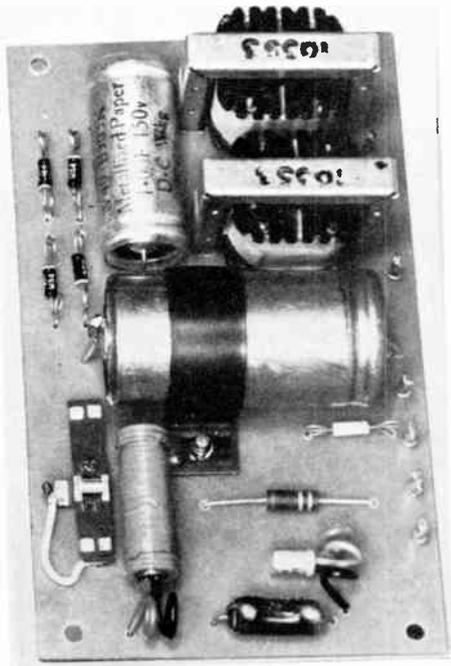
Printed circuit assembly of subscriber control and i.b.a.c. components.
